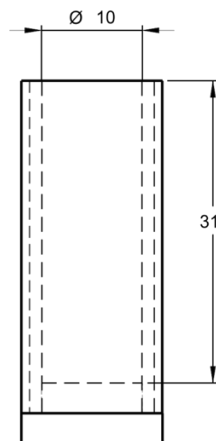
Dimension and the prototype of the mould for casting cylindrical specimen.
